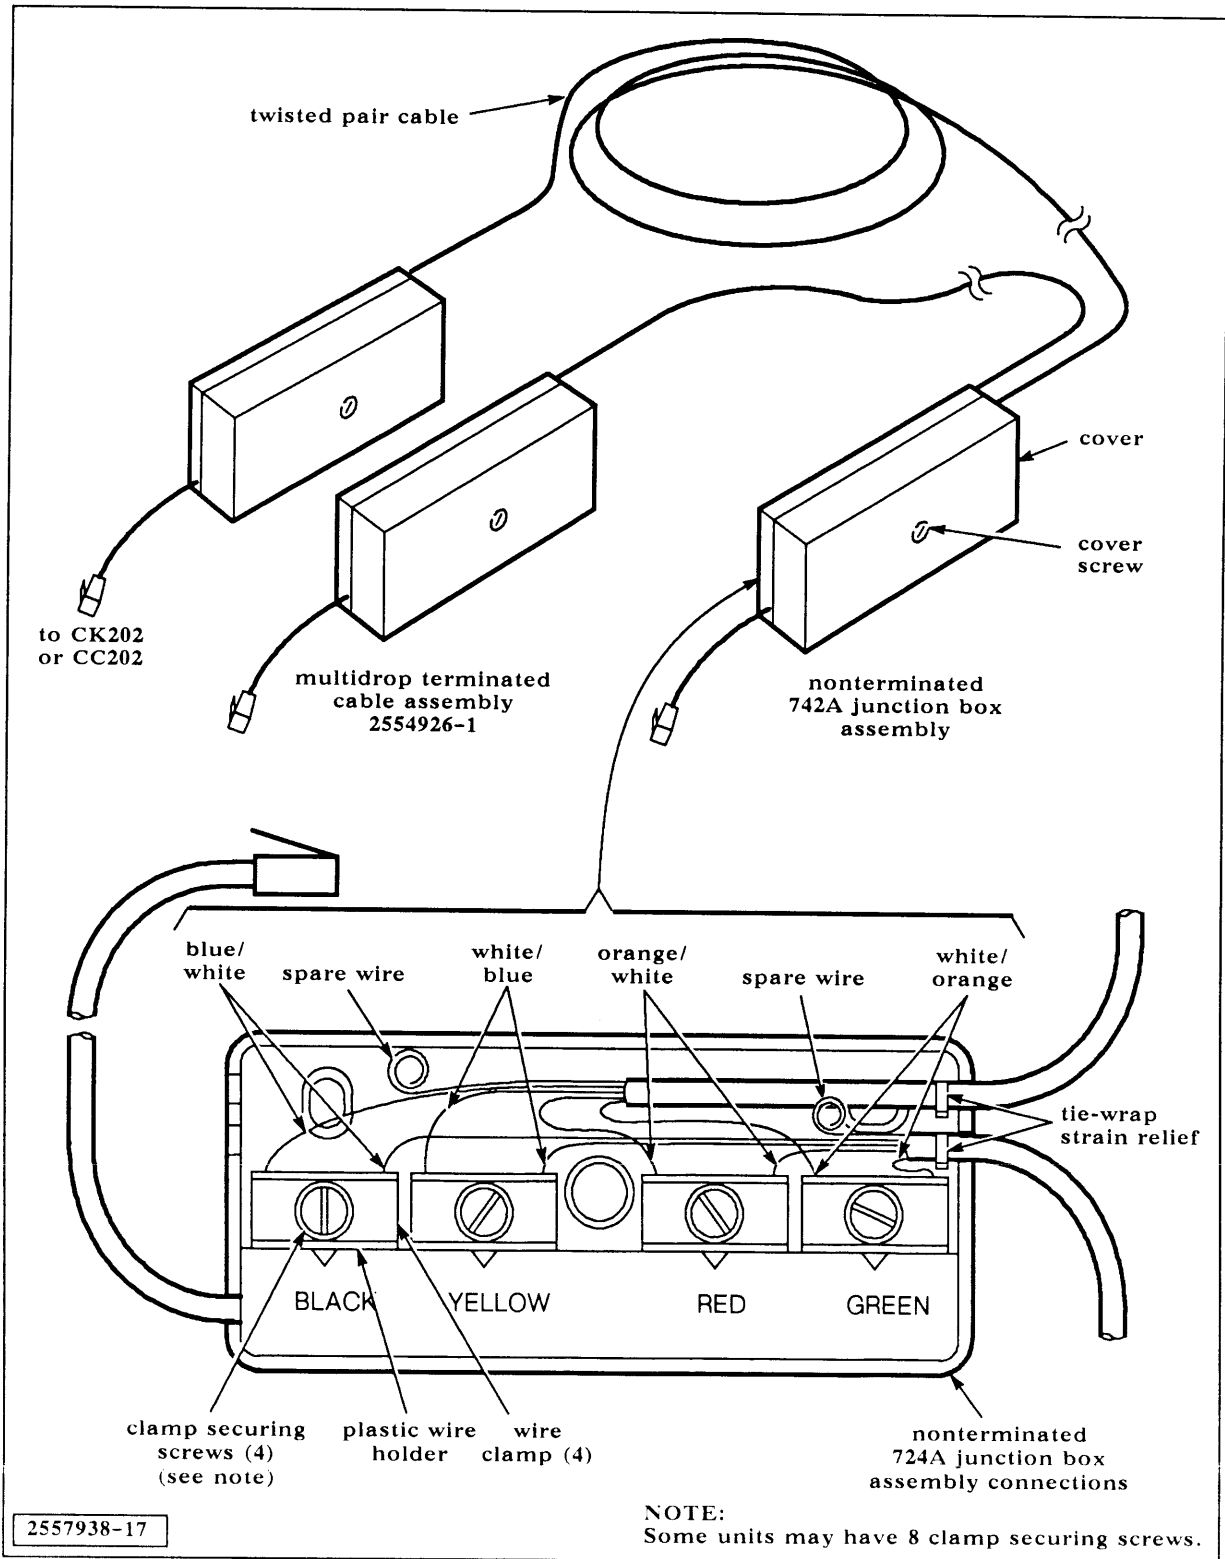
Typical 742A Junction Box Assembly Wiring
